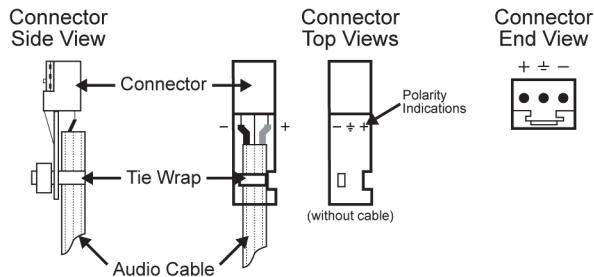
Connector Wiring for Rear Module Input Sockets
